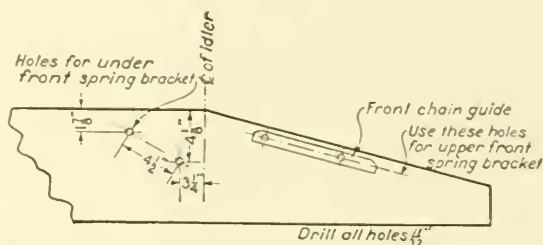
Special holes required in right gatherer chain board, McCormick-Deering corn binder
